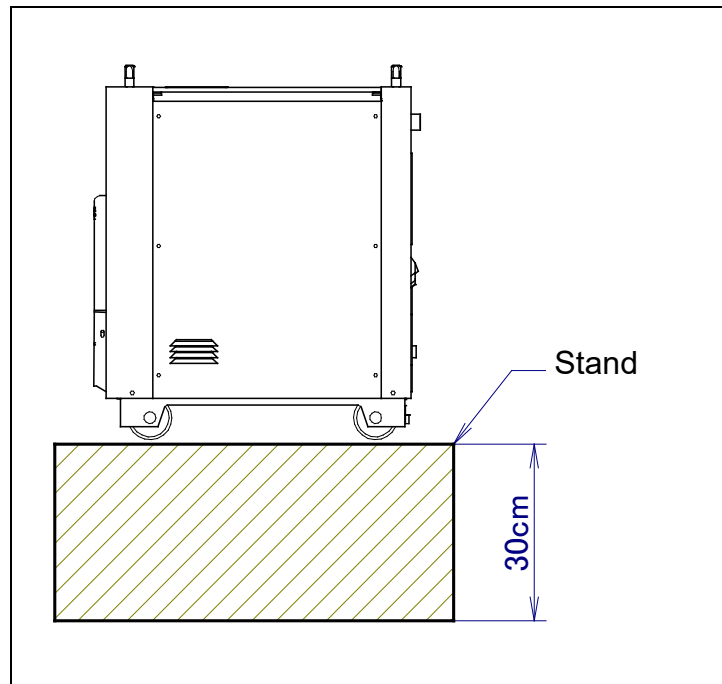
(c) Quantity advance of welding power supply.
